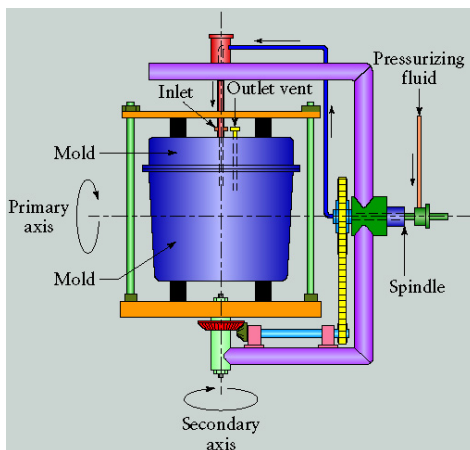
(Kalpakjian) The rotational molding (rotomolding or rotocasting) process.
